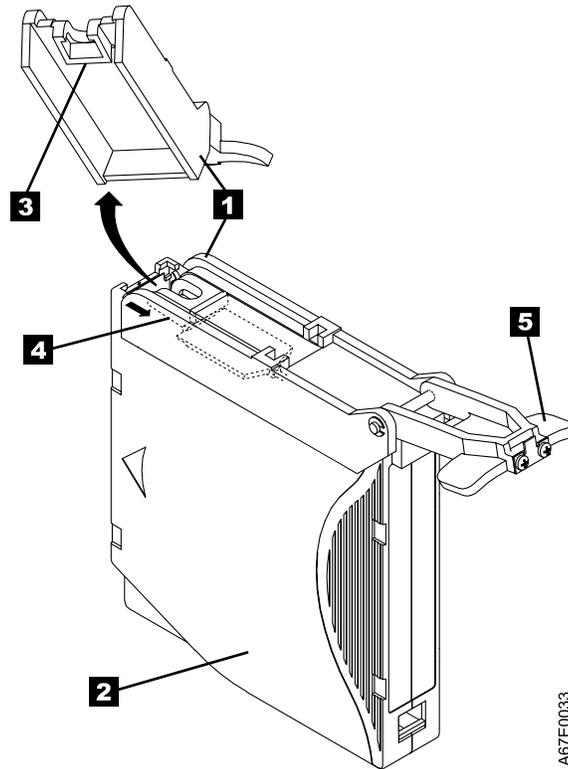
Attaching the leader pin attach tool to the cartridge. To hold the cartridge door open, hook the tool into the door and pull the tool back.
